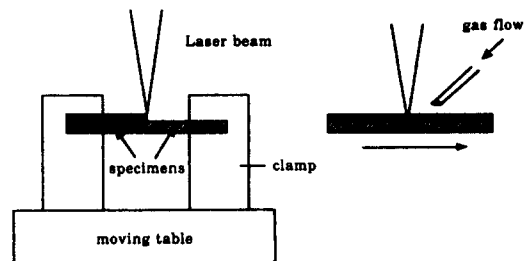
Schematic illustration of laser welding of plates with different thicknesses
